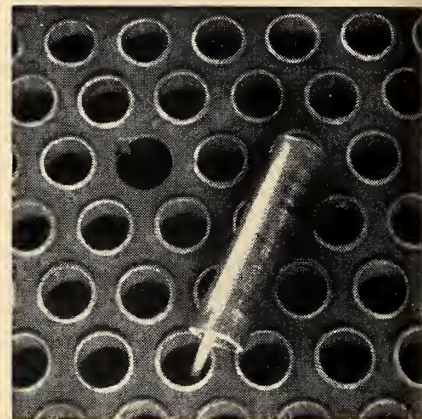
Withdrawn specimen of feed heater tube showing score mark in tube end corresponding to erosion defect in the tube plate.
